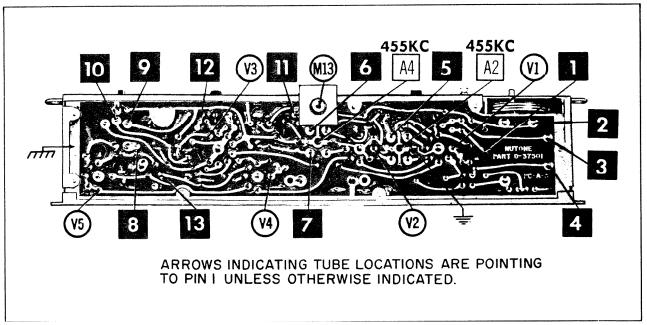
Bottom view of master chassis printed board, with location of printed circuit points as shown on schematic in Fig. 19.
